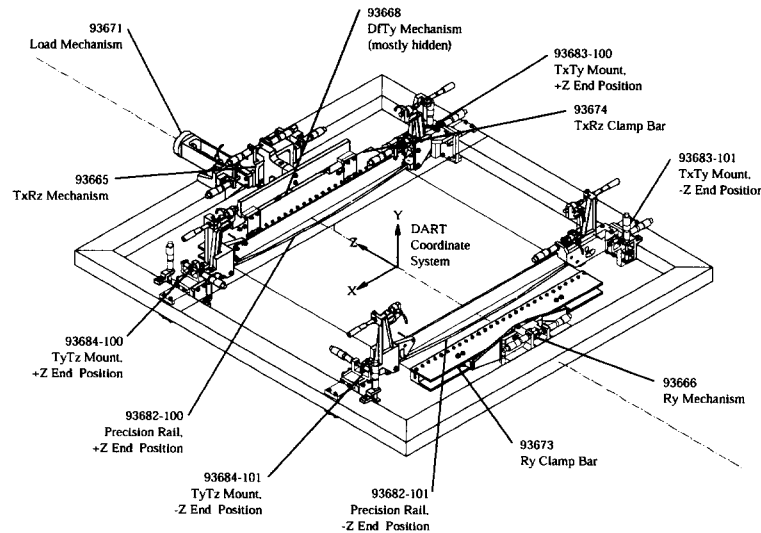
Mechanical layout of a single reflector mounting frame, showing the parabolic clamping bars, the alignment mechanisms and the precision shaping rails.
